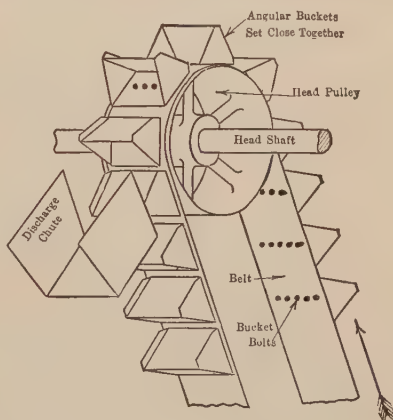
Head of Belt Elevator with Continuous Buckets.
